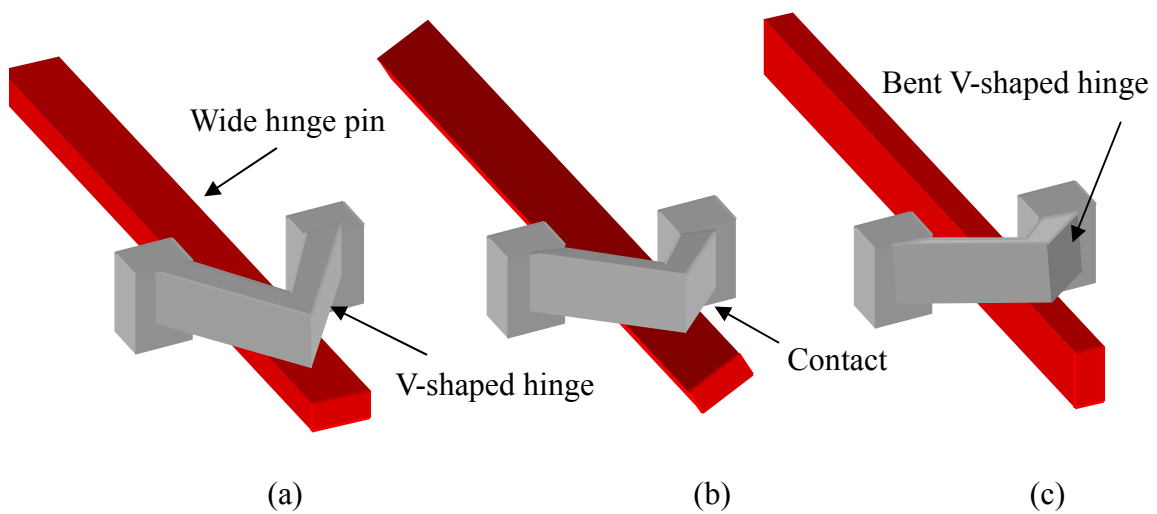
3-D view of the V-shaped hinge during assembly process.
